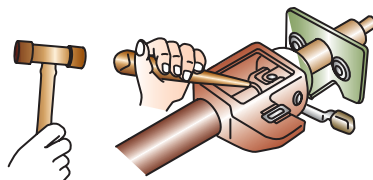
Installing the steering shaft in the lower tube.
